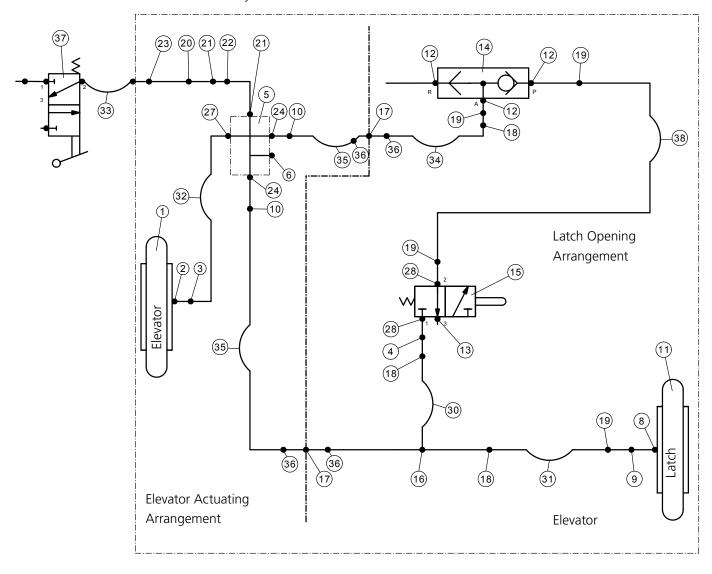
613701-3 Pneumatic Assembly with Feedback
